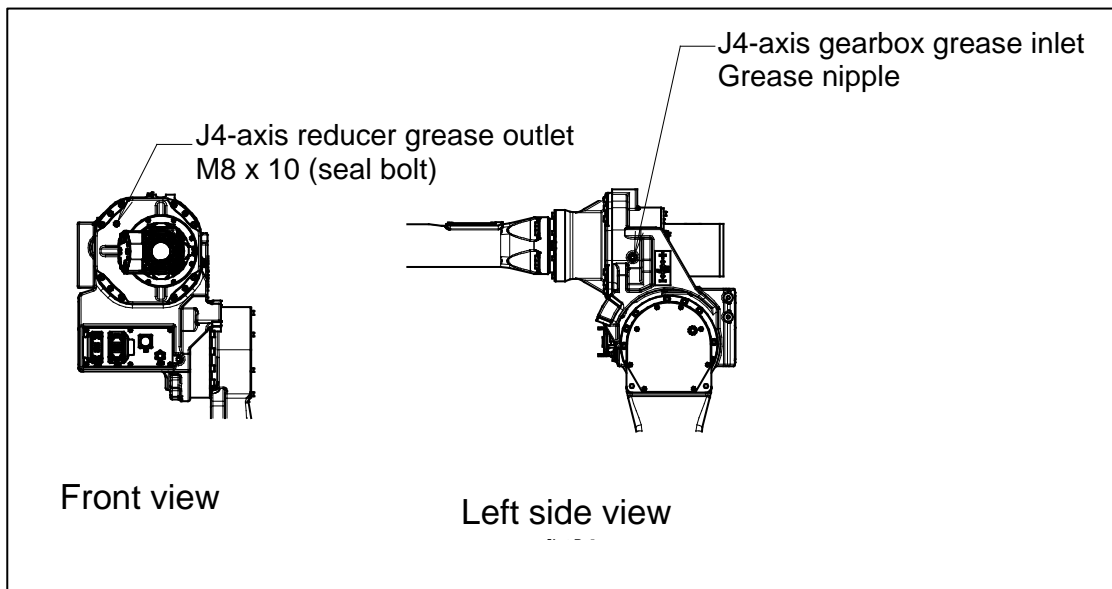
(d) Replacing grease of the J4-axis gearbox
